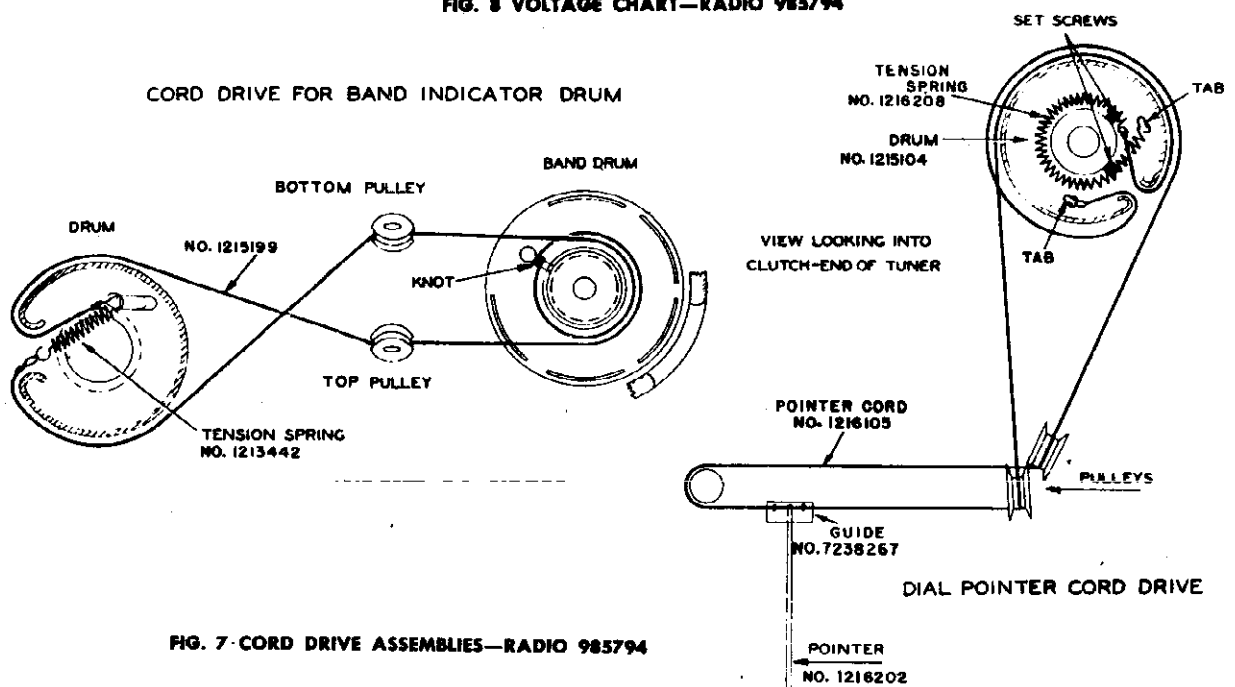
CORD DRIVE ASSEMBLIES—RADIO 985794
